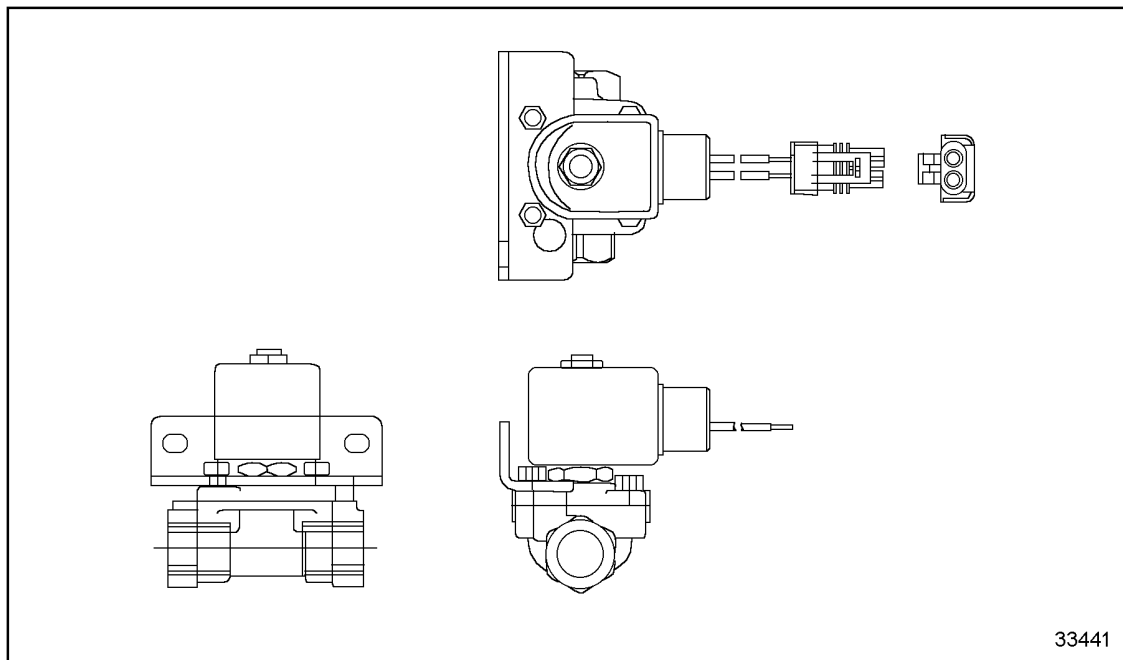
Fuel Shutoff Valve for Series 50G Engine
